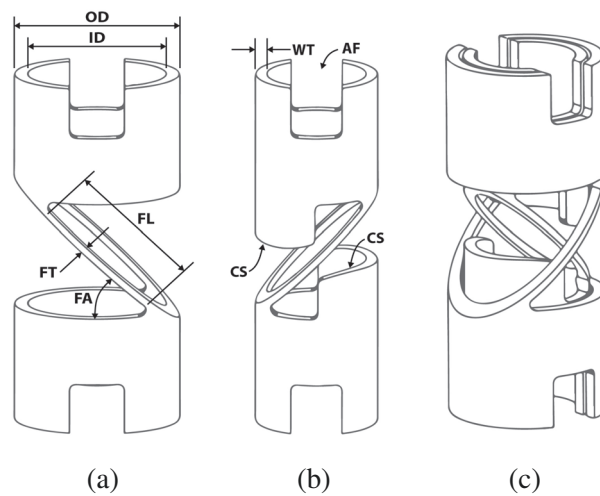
Schematic of a CCAFP showing (a) the outer cylinder where OD is the cylinder outside diameter, ID is the cylinder inside diameter, FL is the flexure length, FT is the flexure thickness, and FA is the flexure angle. (b) the inner cylinder where WT is the wall thickness, AF is an alignment feature, and CS is a stress-limiting cam-surface. (c) the assembled mechanism. Notice that the cam-surfaces are only on the inner cylinder in this particular configuration.
